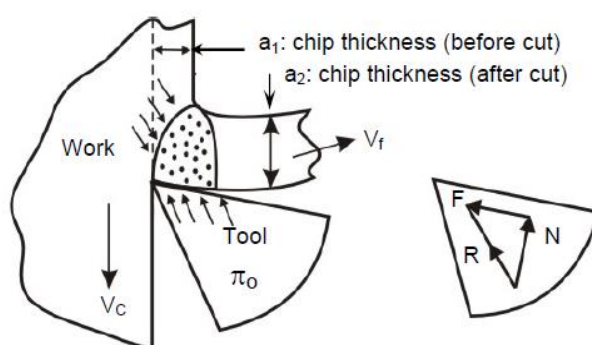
Compression of work material (layer) ahead of the tooltip [37].
